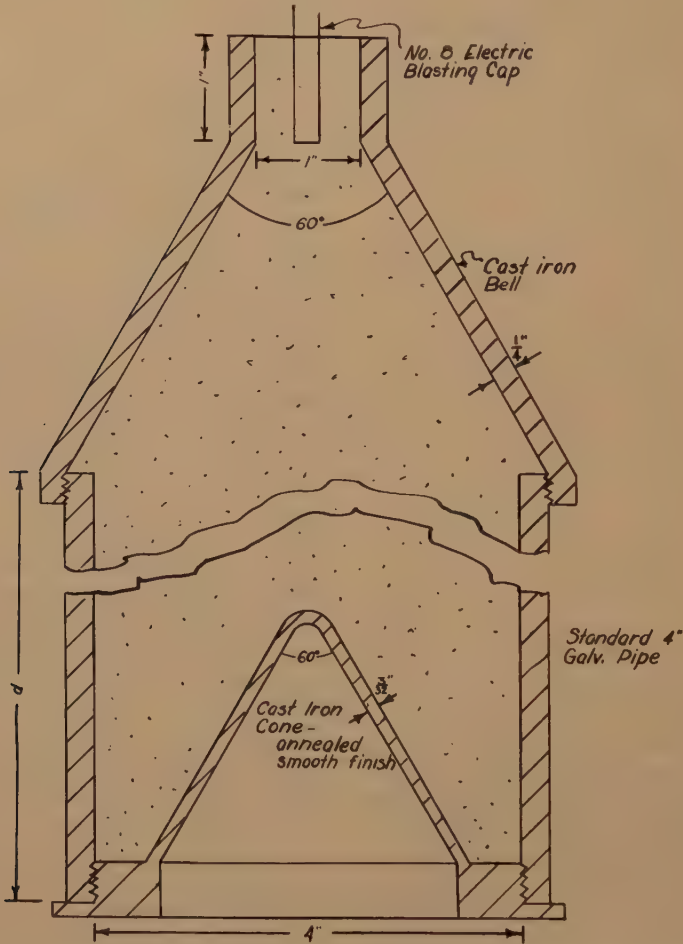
SHAPED CHARGE WITH CAST-IRON CONE LINER, CAST-IRON BELL AND GALVANIZED PIPE CASE.
